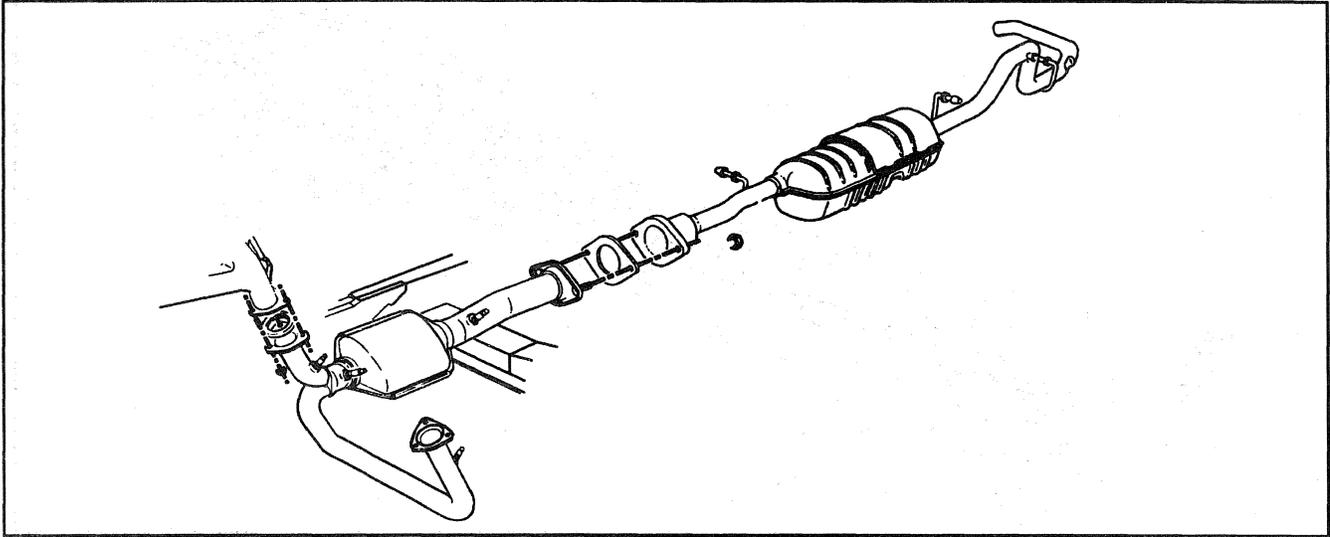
Exhaust System - C/K 1 Extended Cab Short Box w/4.3L Engine
